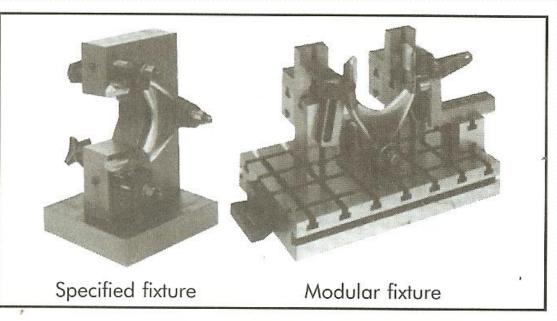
Two methods of constructing a milling fixture. (Courtesy Flexible Fixturing Systems, Inc./Erwin Halder, Ltd.)
